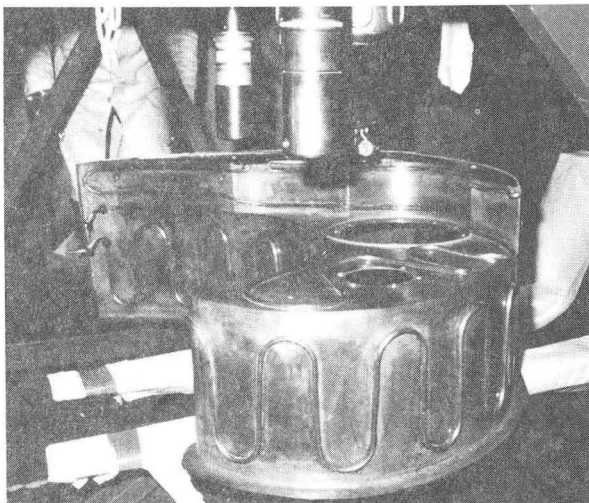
Coupler, tuning capacitor and upper dummy liner during assembling.
